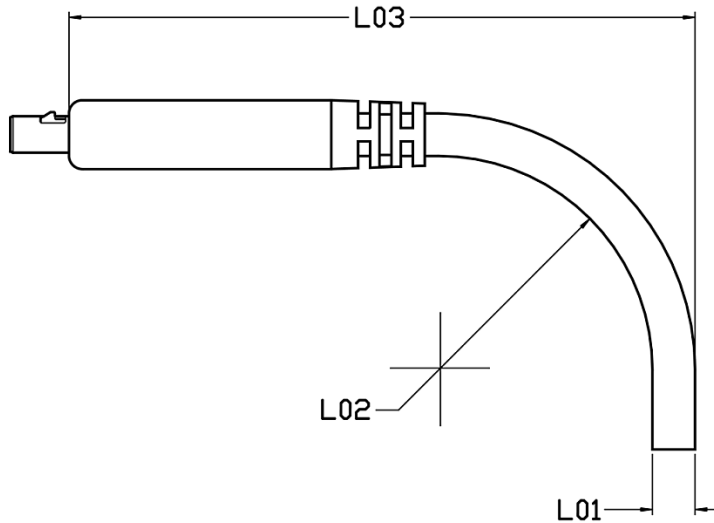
8. x4 Free External Cable Assembly Bend Radius
